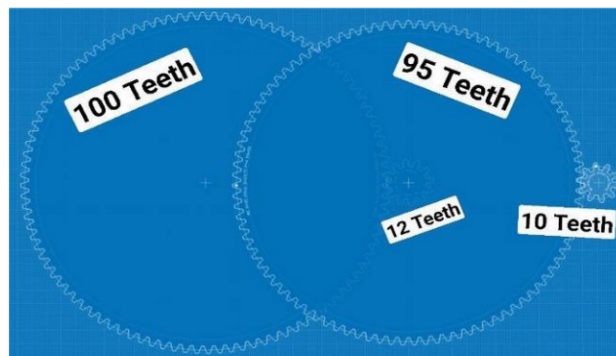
Final gear ratio used for the design. 12 and 95 teeth gears are axially connected
